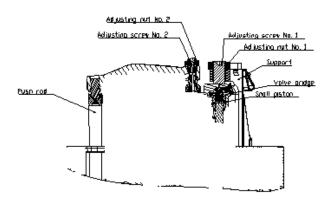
Adjustment of exhaust valve and EVB clearances
